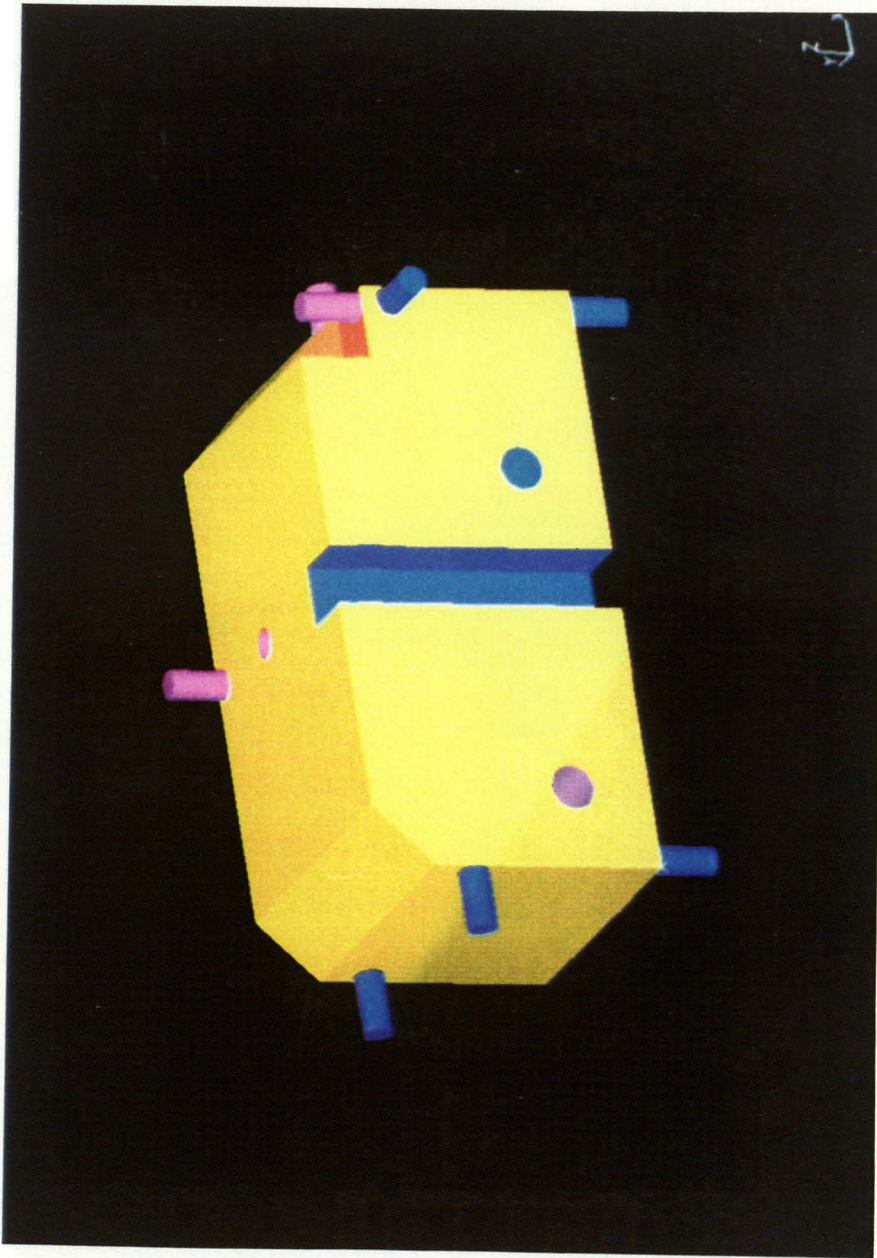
An isometric view of the workpiece with locators in blue and clamps in magenta
